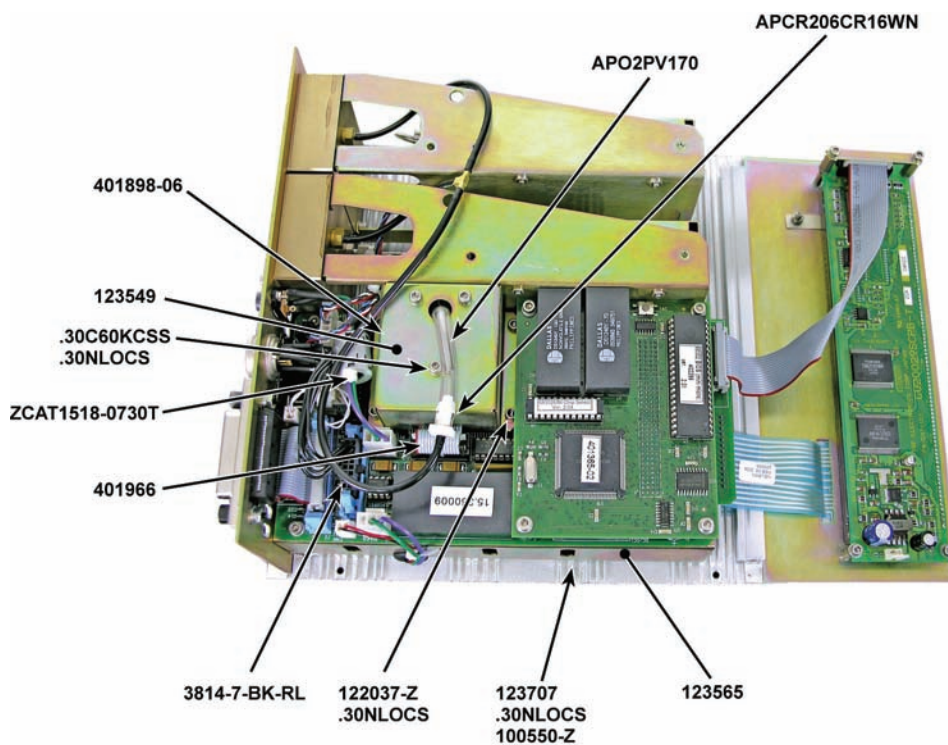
RPM4 Illustrated Parts Breakdown of Internal Assembly
